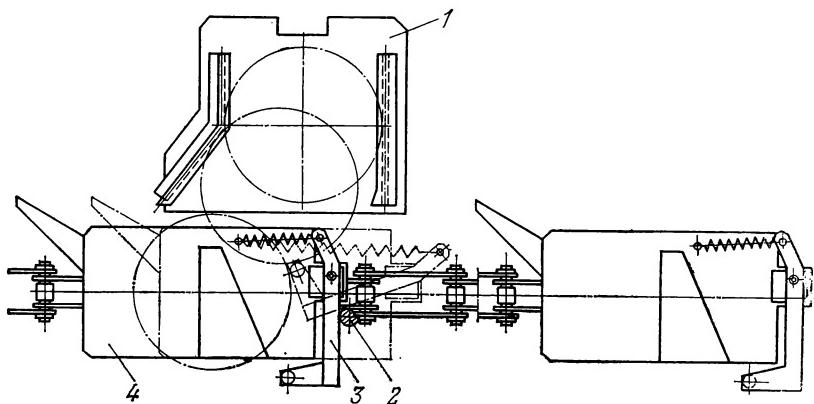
Workpiece delivery from a conveyer truck to the input trough of a machine tool
